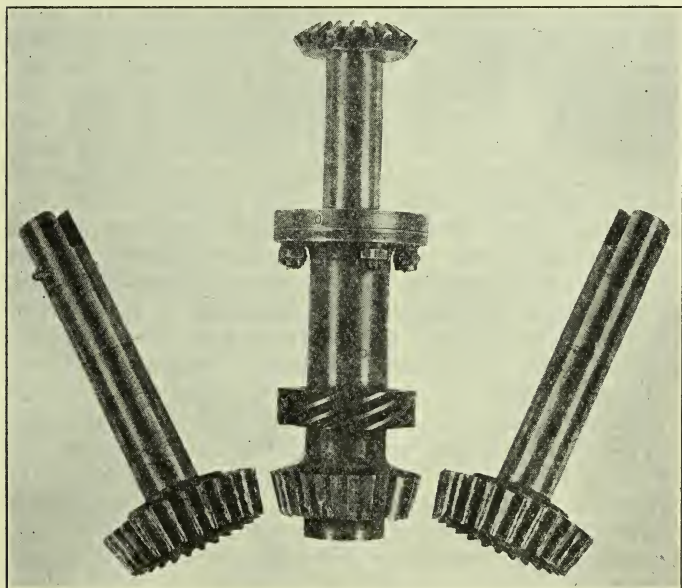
TYPICAL SET OF CRANKSHAFT GEARS THAT HAVE BEEN DAMAGED BY WHIPPING OF THE CRANKSHAFT
